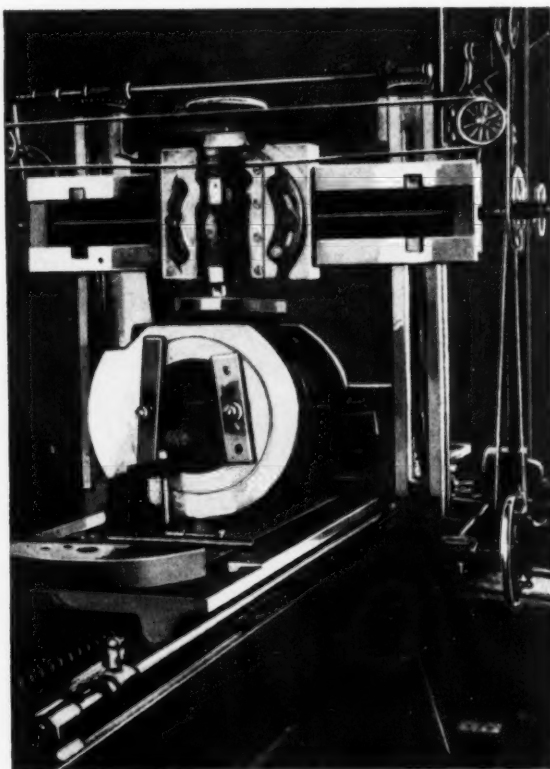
Screw-driven Planer Equipped with Reversing Toolholder for Cutting in Both Directions—Built in 1839
